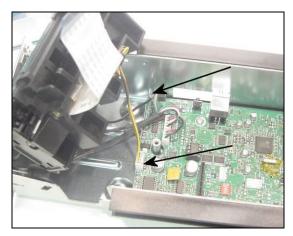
Printing Mechanism - PayCheck™ 1, 2 & 3
